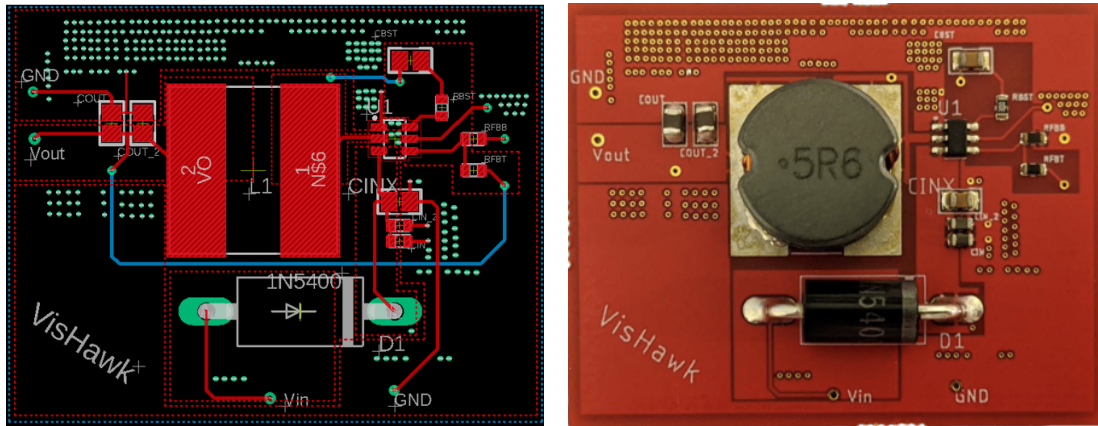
Custom 2-layer 5 volt regulator PCB designed to power companion computer. Left: Schematic of the PCB. Right: The fabricated board.
